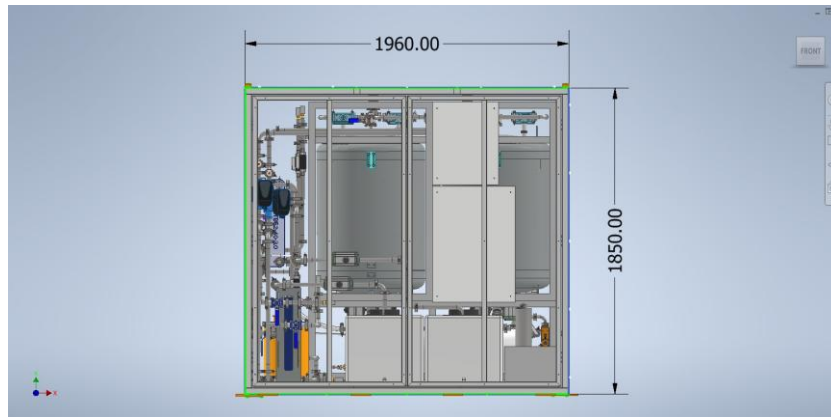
Side view of the rendering of one SDC prototype illustrating the external dimensions and the internal arrangement of the principal components.
